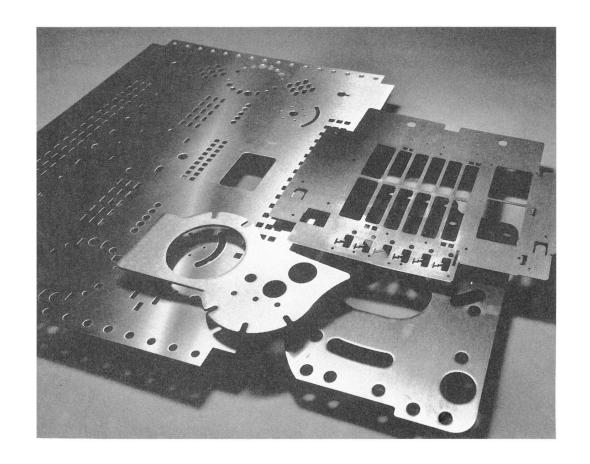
Several sheet metal parts produced on a turret press, showing variety of hole shapes possible (photo courtesy of Strippet, Inc.)
